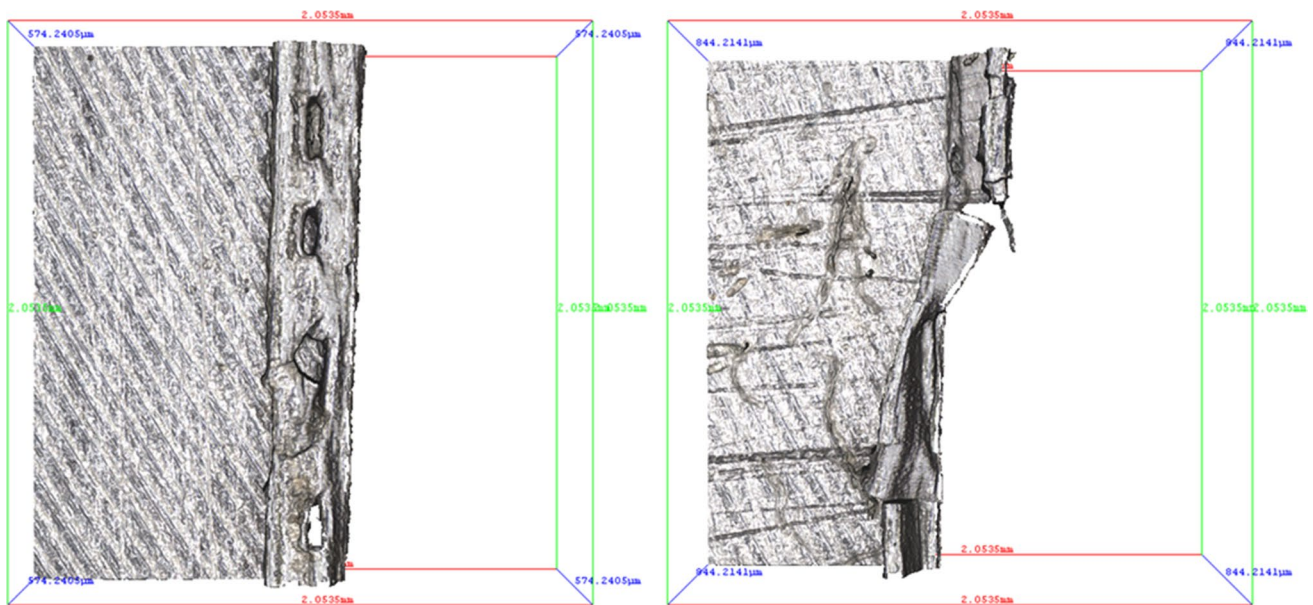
Flat and irregular burr formation in MQL ($f_z = 0.06$ mm, $V_c = 169.65$ m/min, $a_e = 0.50$ mm, $a_p = 25$ mm)
